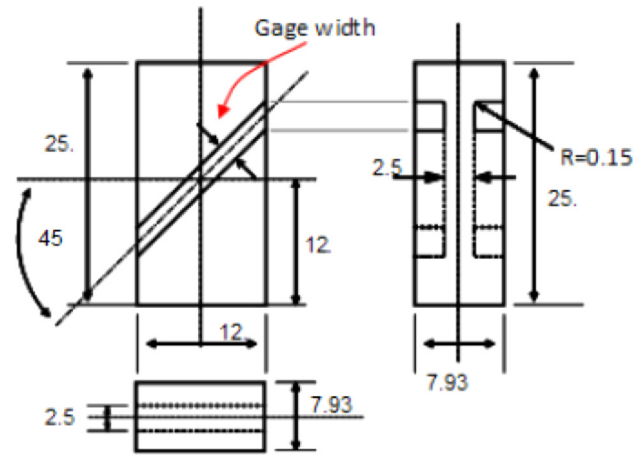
Geometry and dimensions (mm) of the shear compression specimens
